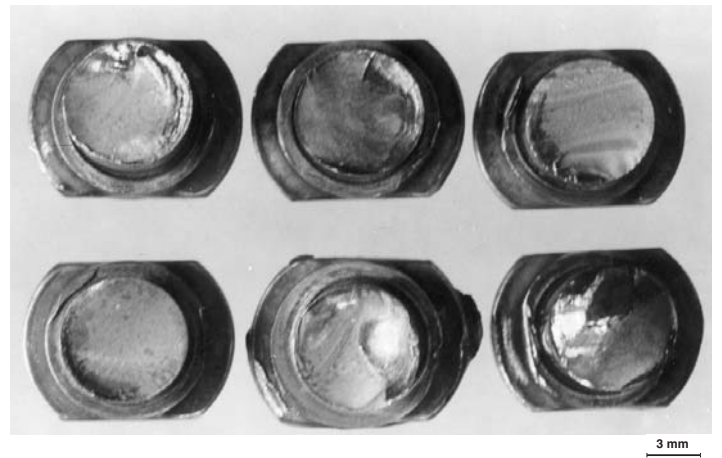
Fracture surfaces of the six failed bolts in the bevel gear
